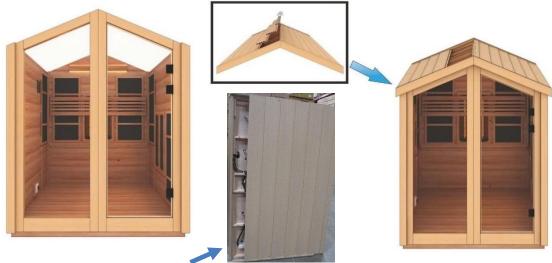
Two sections of the ROOF PANEL will need to be removed before installing
